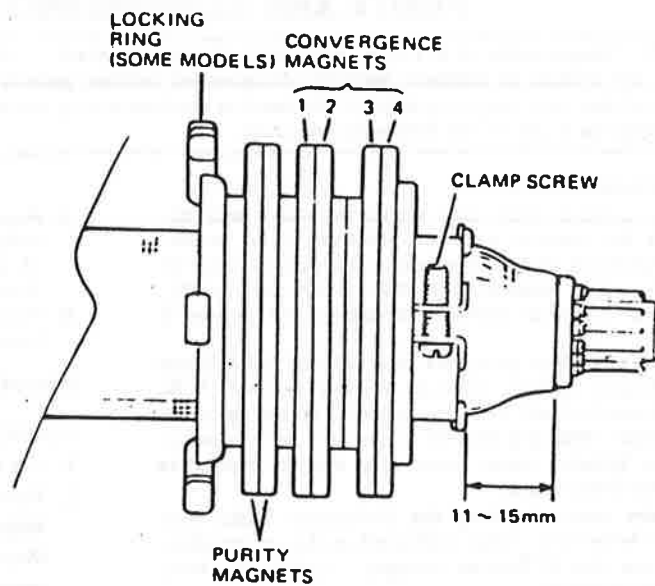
CONVERGENCE AND PURITY MAGNETS ASSEMBLY POSITIONING
